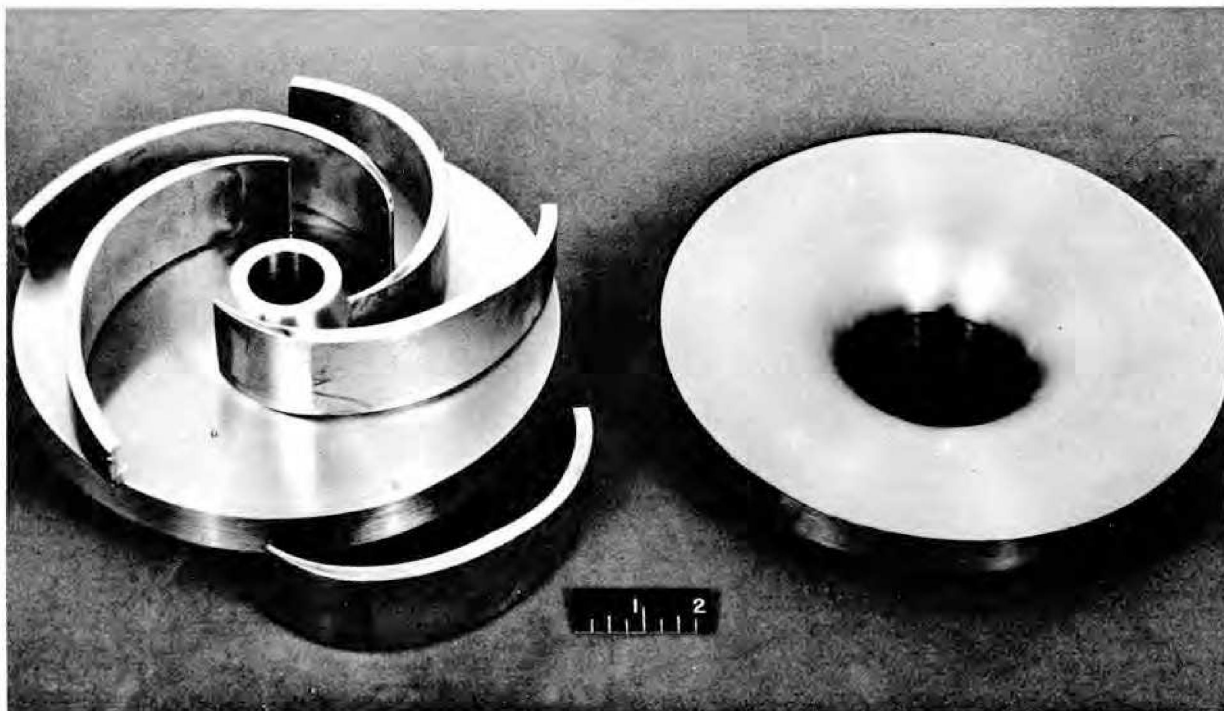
Rough-Machined Parts of Inconel Impeller.
